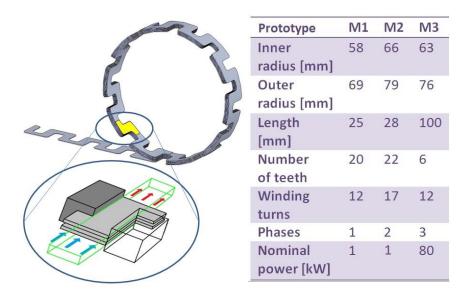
Illustration of the laminated winding design. A coolant is able to flow through the winding laminates, table 1 show winding parameters of the three winding prototypes.
